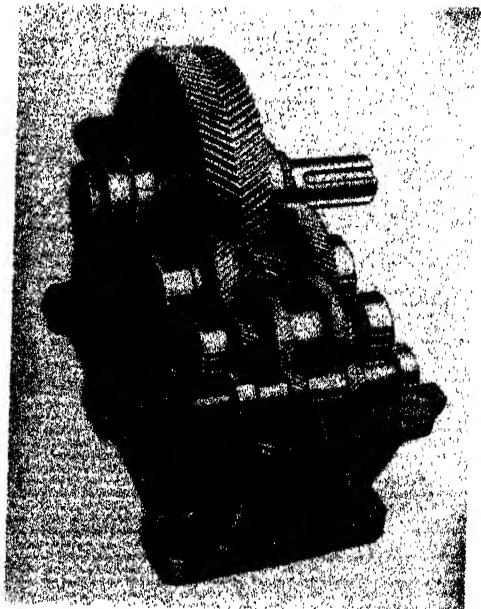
B. HERRINGBONE SPEED REDUCER (Courtesy, W. A. Jones Foundry and Machine Co.)
